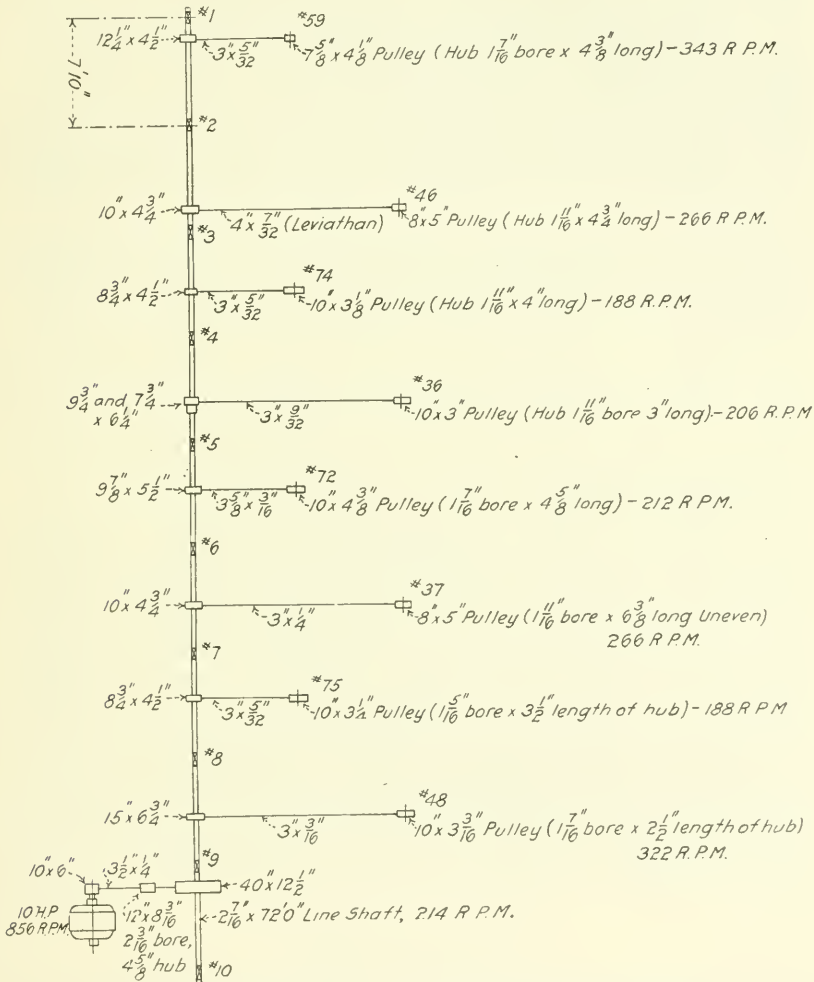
ARRANGEMENT OF LINE SHAFT AND BELT DRIVES
